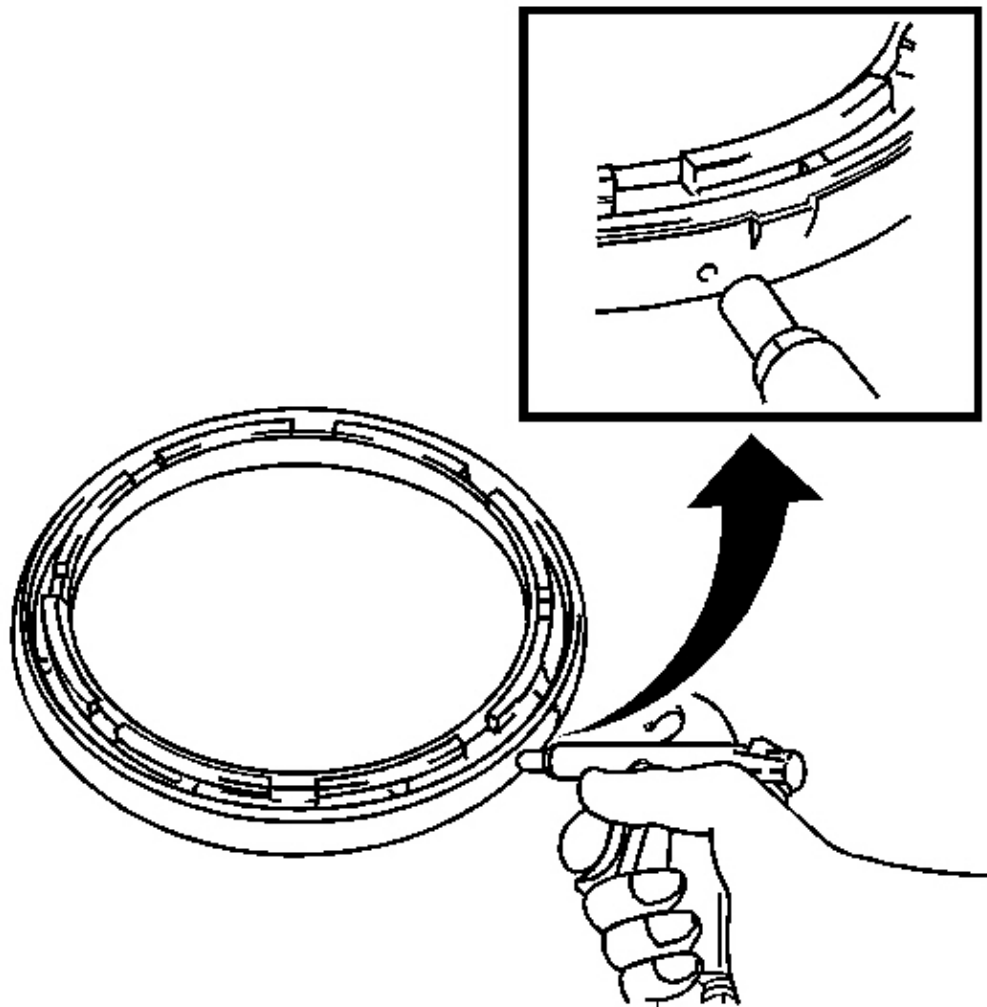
Applying Compressed Air To 2nd Brake To Remove 2nd Brake Piston From The 2nd Brake Clutch Cylinder
